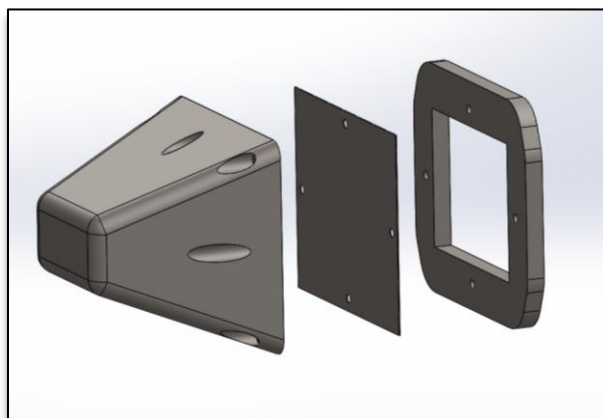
Exploded View of Impact Attenuator, Anti-Intrusion Plate, and Front Bulkhead, Shown in Order Left to Right
